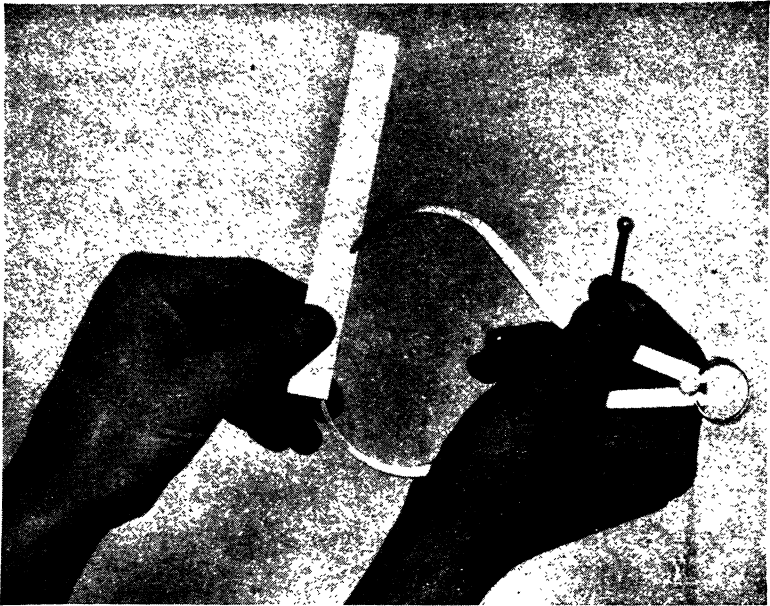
Taking the measurement of an outside caliper setting using finger to steady one end of caliper against scale.
